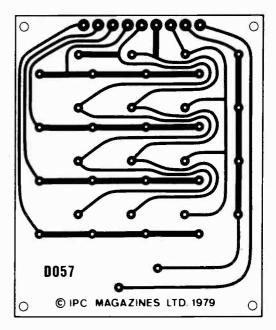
Copper pattern for the keyboard pcb, reference D057.
